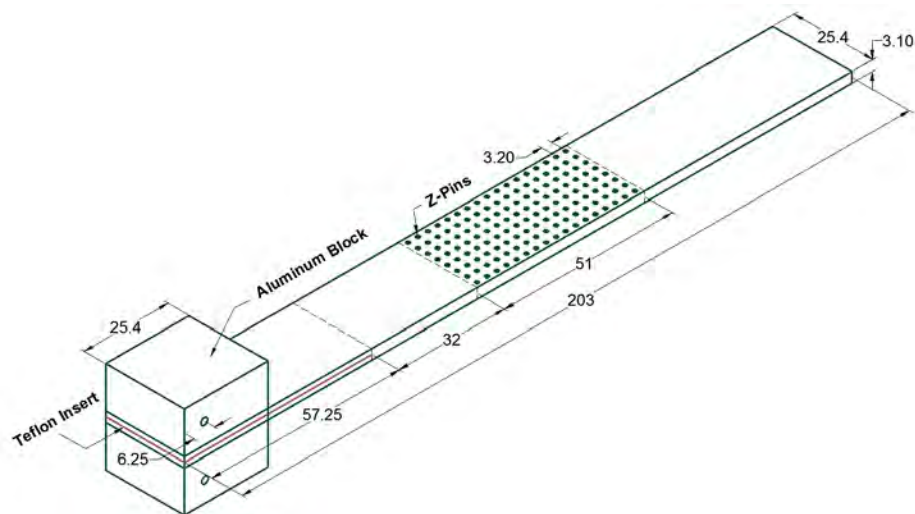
Schematic of Double Cantilever Beam Specimen
